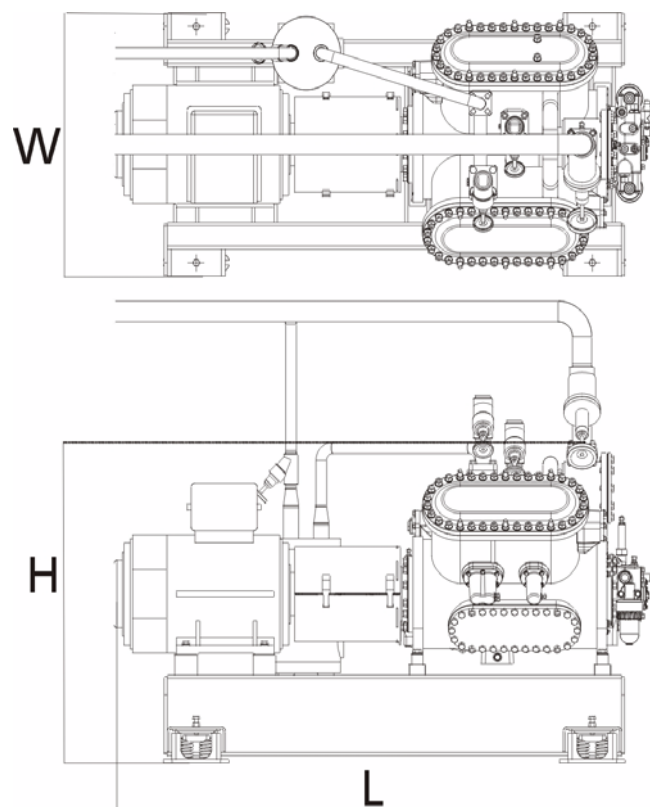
Packaged base frame for mounting on vibration dampers for direct drive
